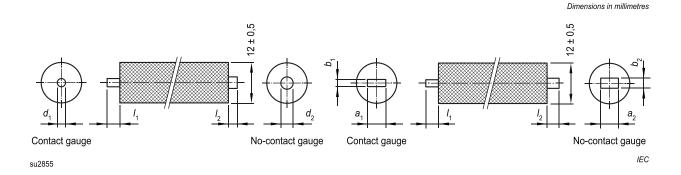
Gauges for checking point of first contact Table 3 Dimensions of contact gauge
